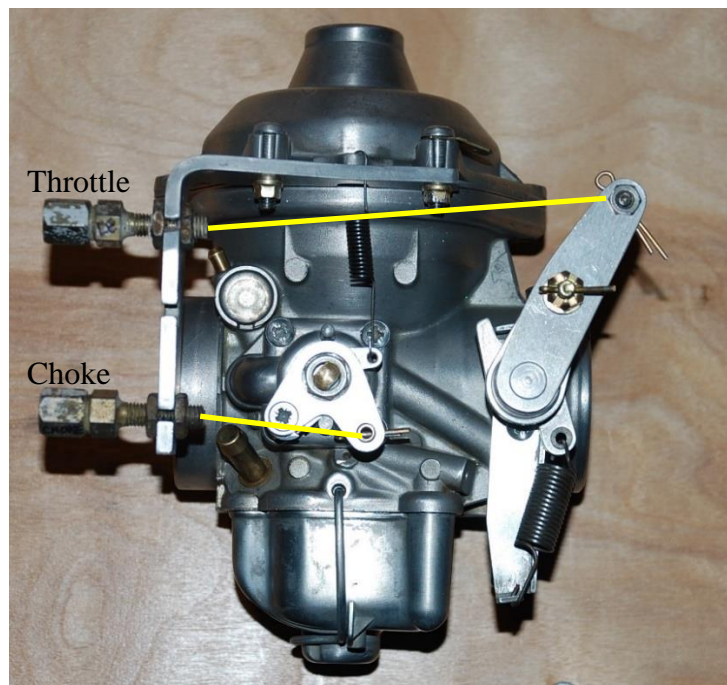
Cleaned and reassembled Bing 94 CV carburetor from the Jabiru 3300 engine.
